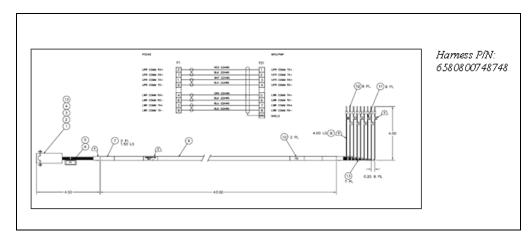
Harness cable from PCI-PCDAQ to TS1
